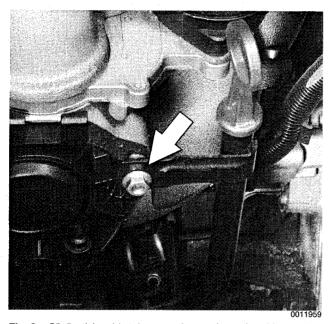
Oil dipstick guide tube mounting nut (arrow) on M44 engine. Use new O-ring at base of tube during installation.
